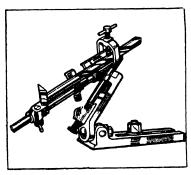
Twist-drill grinding attachment to fit to any emery wheel or grindstone
